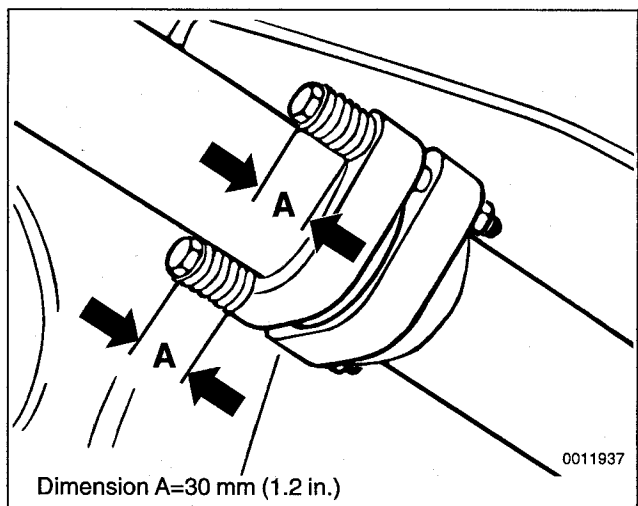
On 4-cylinder engines, tighten nuts evenly so that springs are preloaded to Dimension A.
